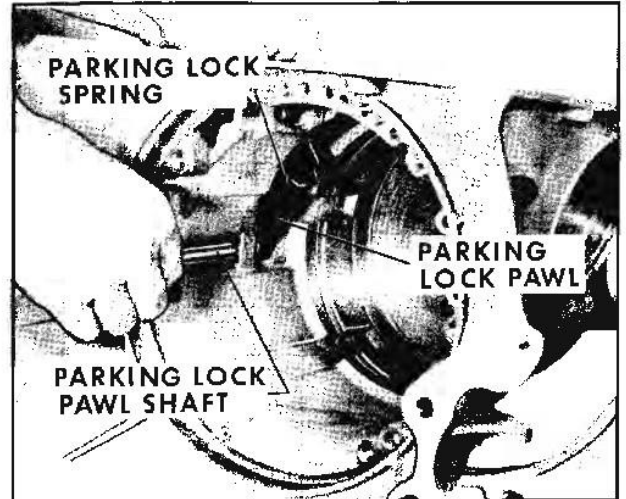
B-116 Installing Parking Lock Pawl Shaft
